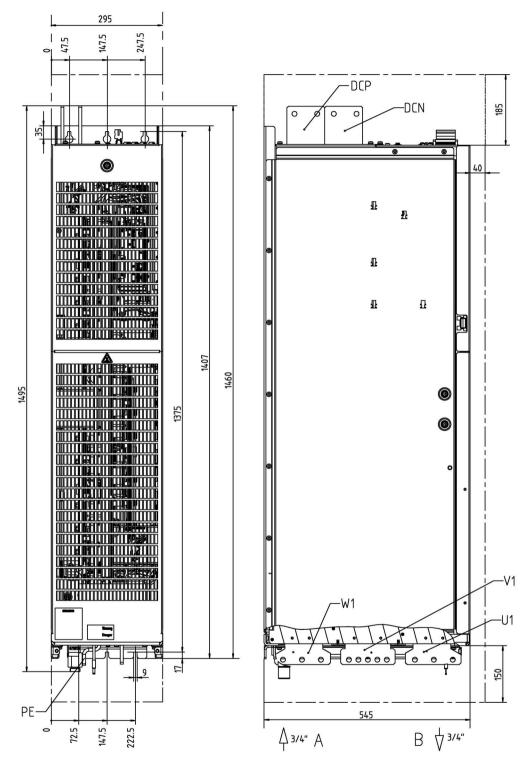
Dimension drawing Active Line Module, frame size JXL, article number 6SL3335-7TG41-6AA3. Front view, side view
